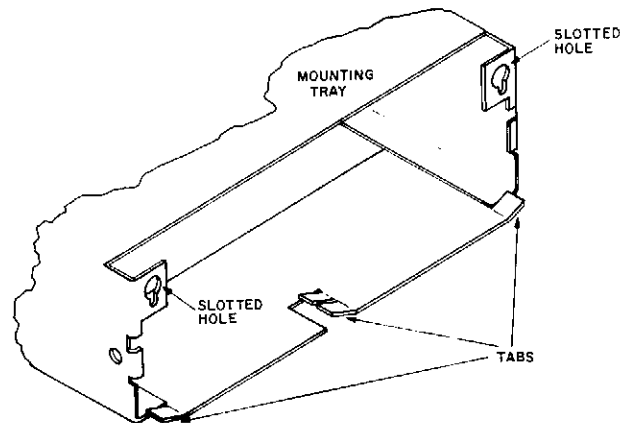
MOUNTING TRAY, REAR VIEW
